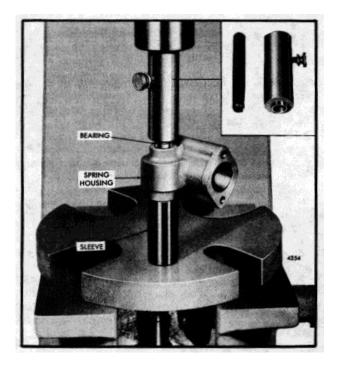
Installing Speed Control Shaft Bearings in Spring Housing using Tool J 9196.
